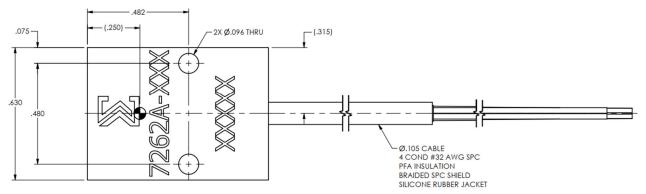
Outline drawing of 7262A, showing the mounting hole pattern for the 2-56 screws.
